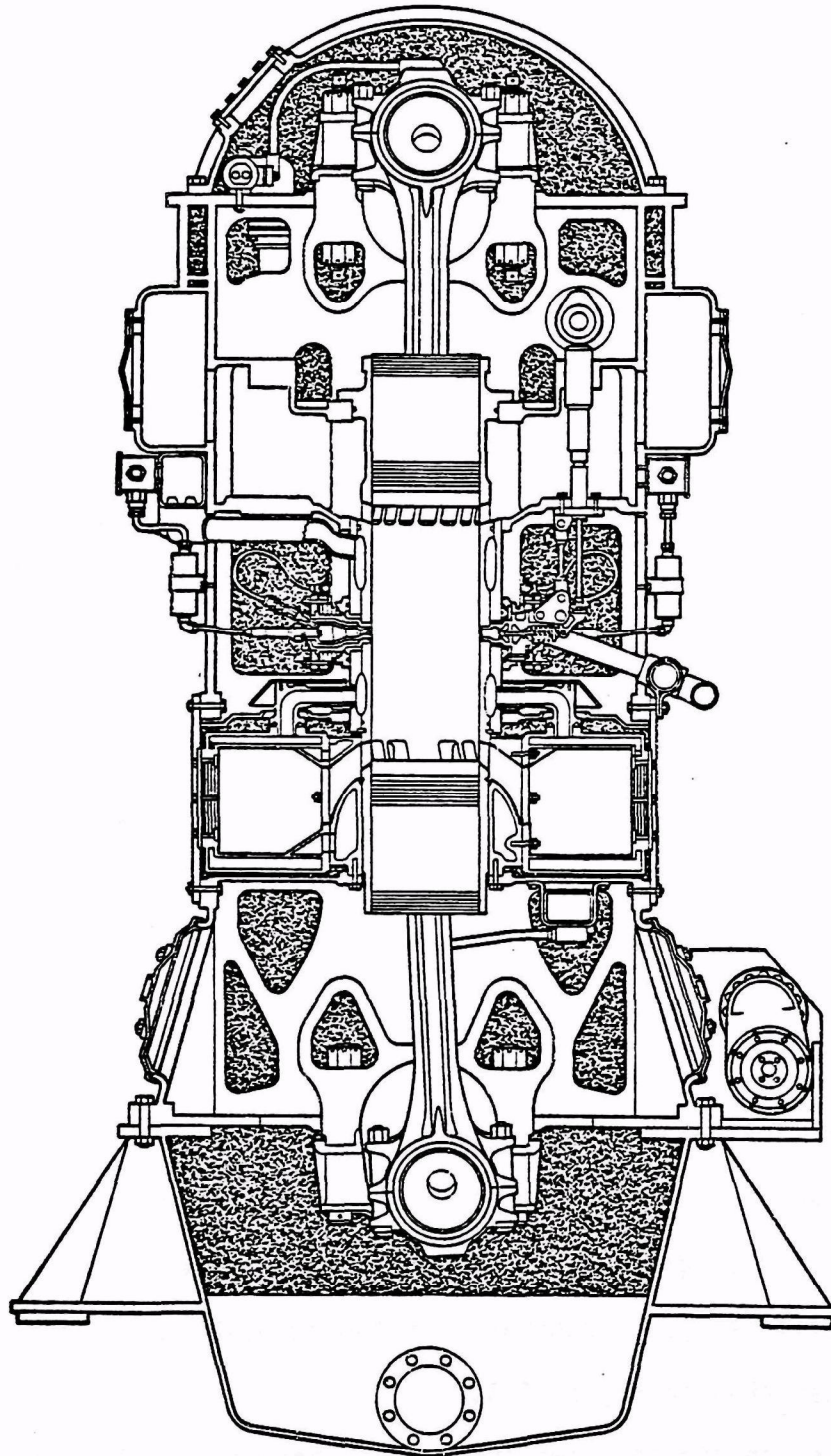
Cross section of opposed piston spark-ignited Model 38DS8-1/8 engine (courtesy of Fairbanks Morse Division of Colt Industries).
